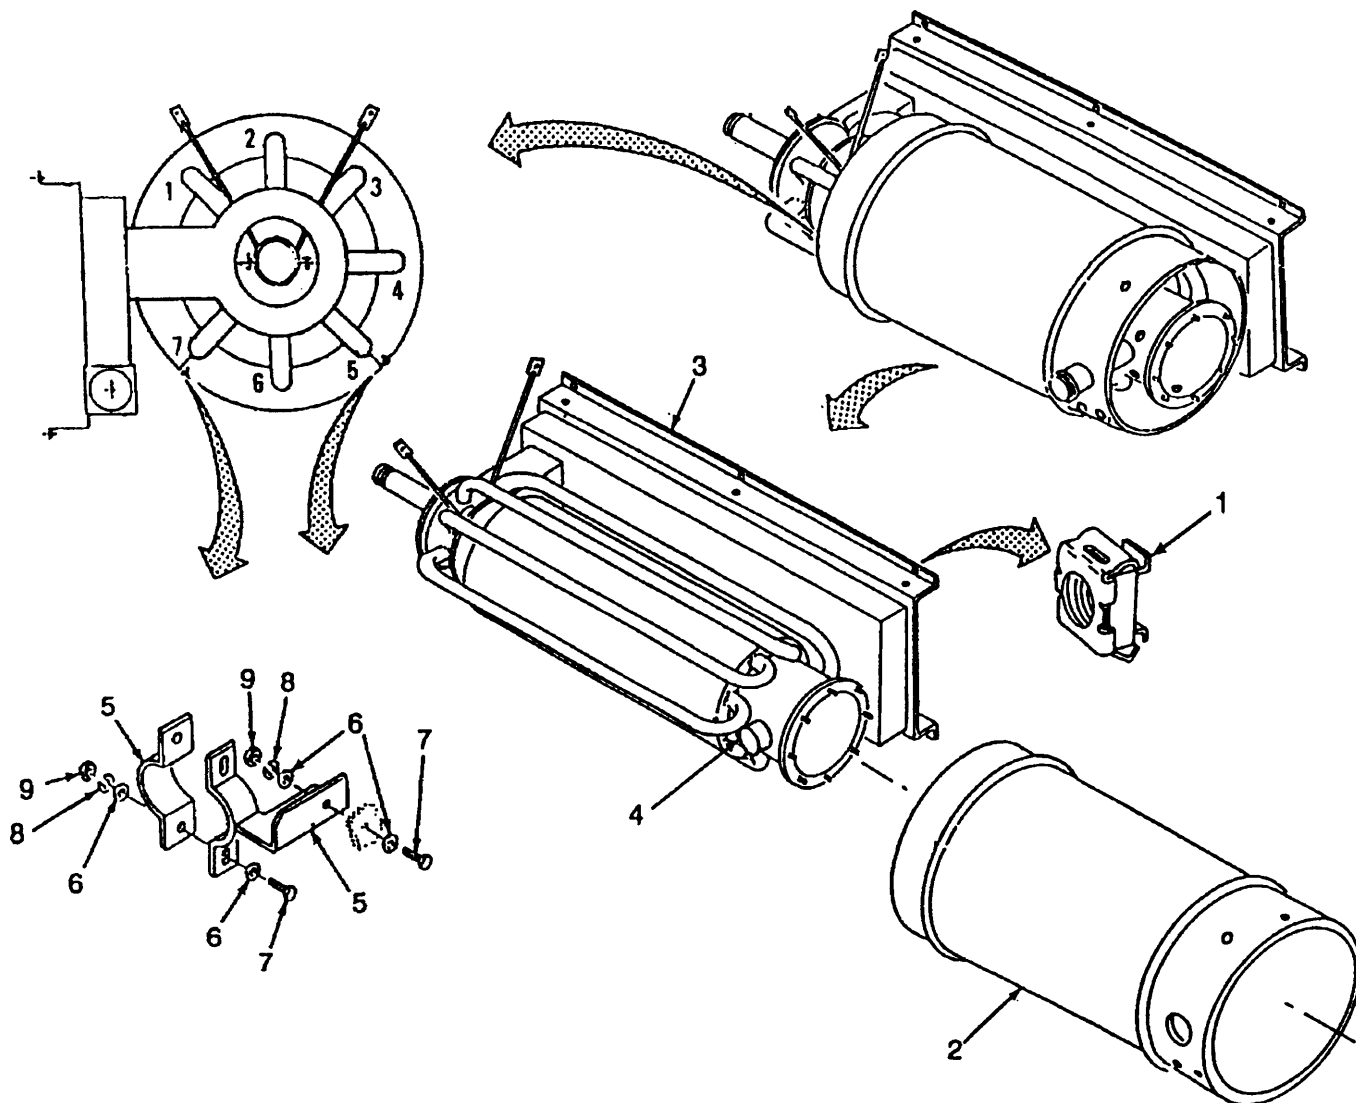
Heat Exchanger, (Model H120) Assembly
